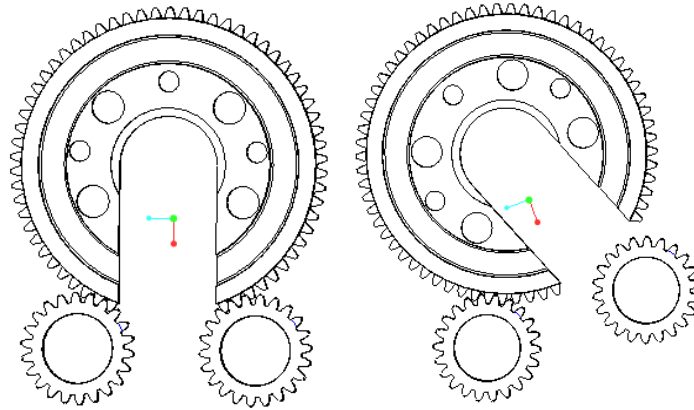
Double Idlers engage with Open Gear Fig.2 Single Idler engages with Open Gear
